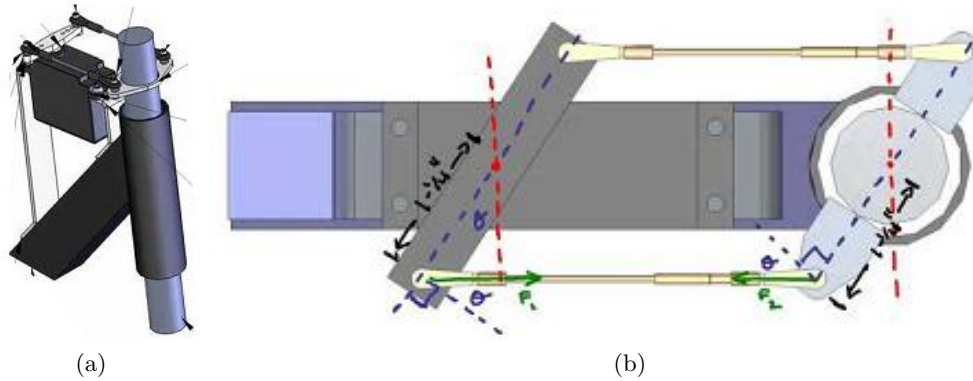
(a) Steering actuator design; (b) Steering mechanism top view [44].
